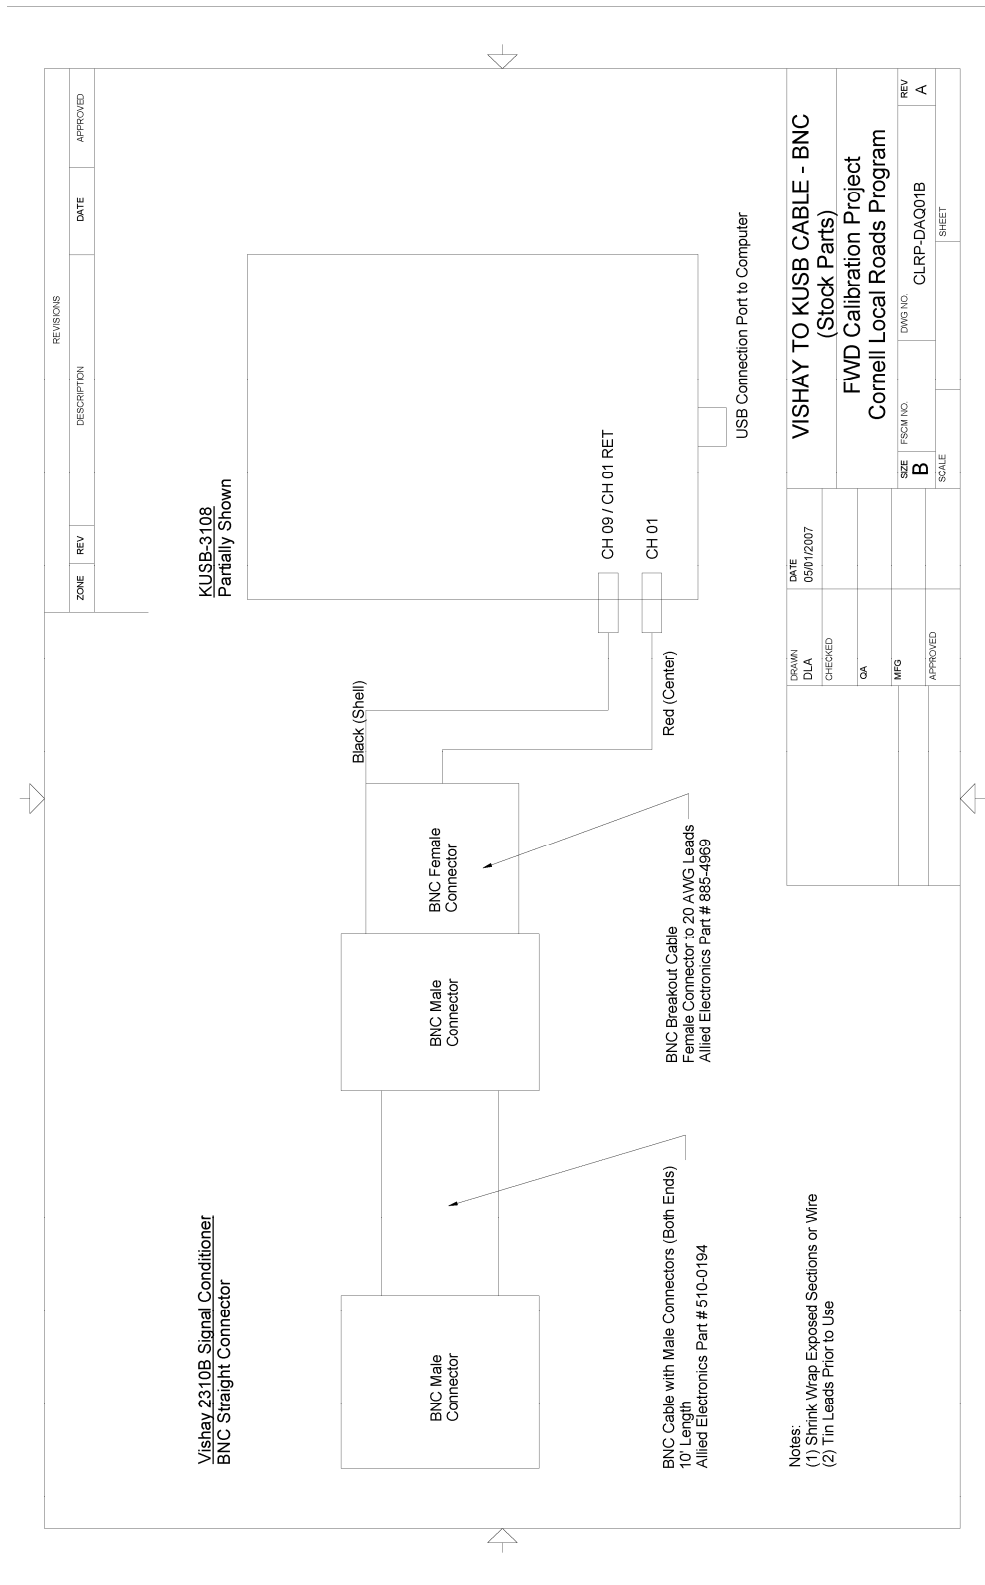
Drawing. CLRP-DAQ01B Vishay 2310B BNC to DAQ Cable (Stock Parts).
